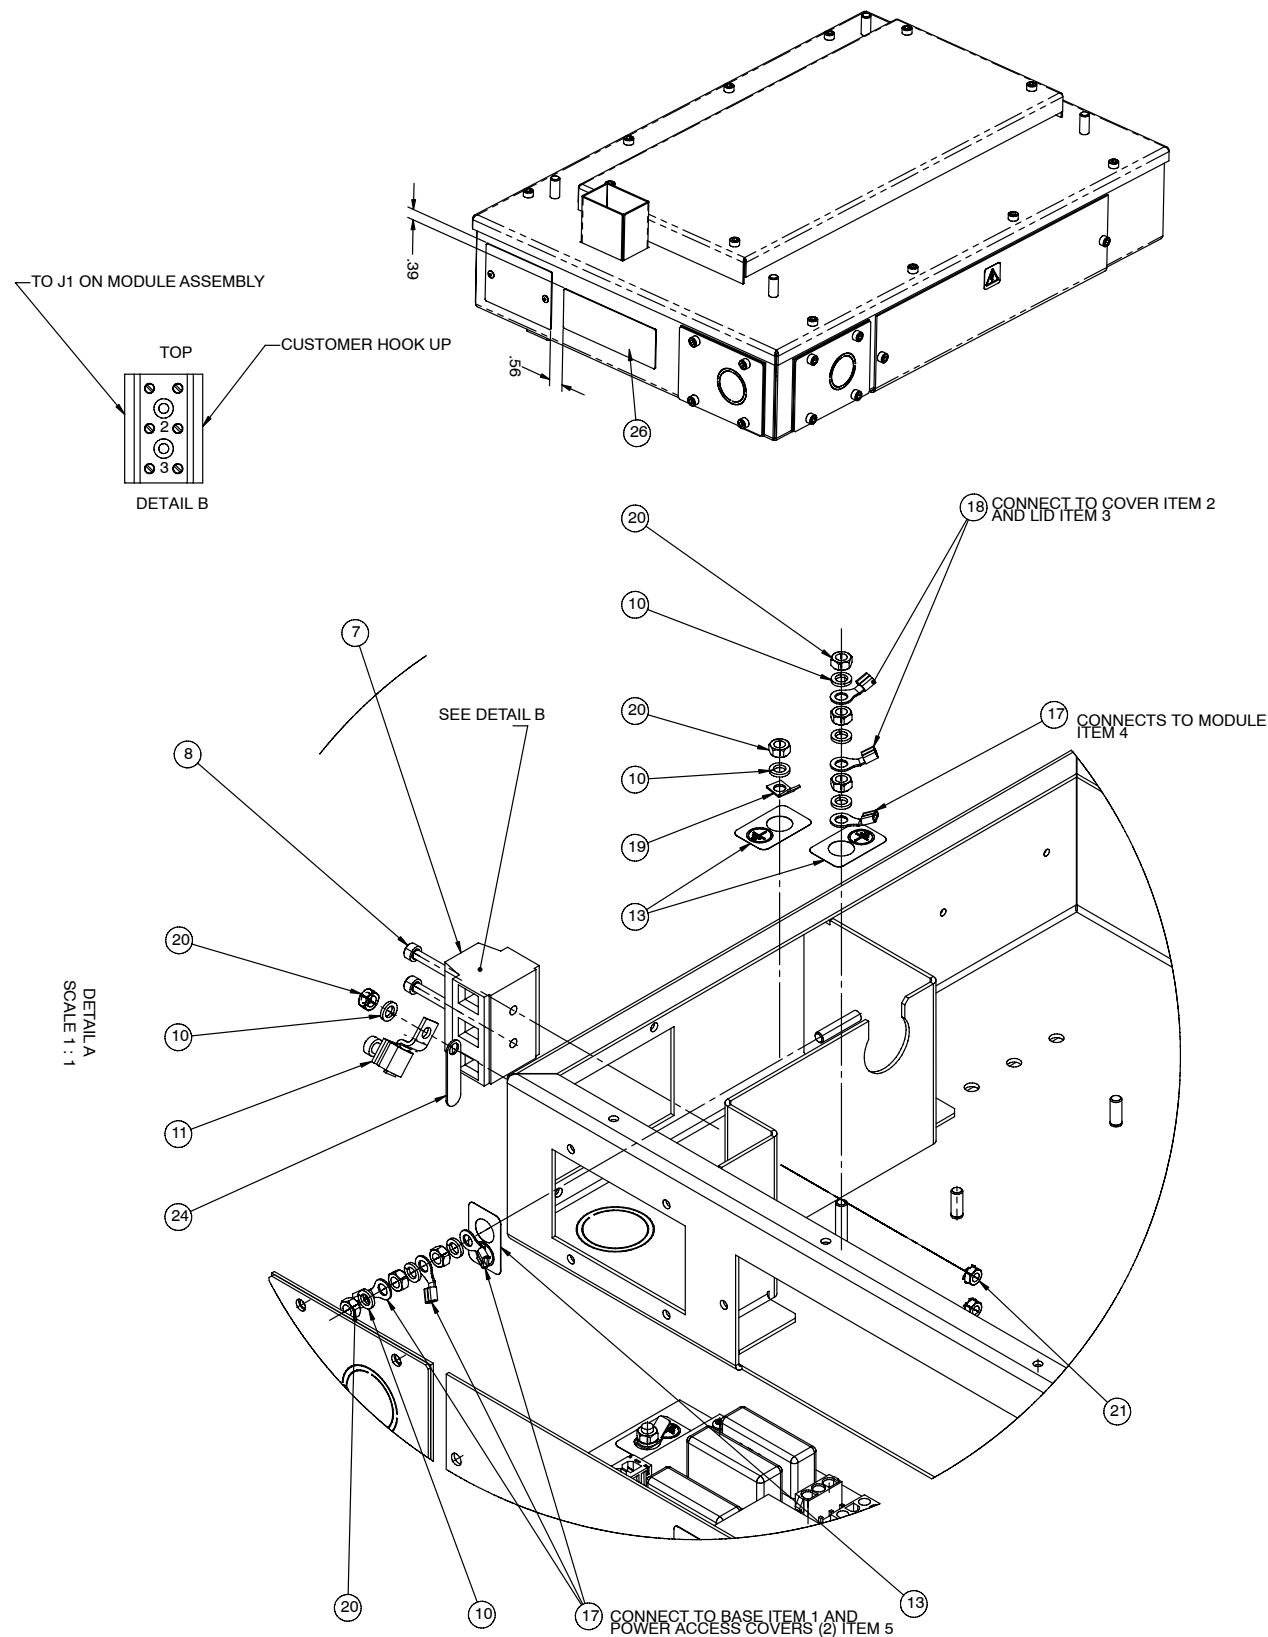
Transformer base assembly, 400/480V Delta (2 of 2)
